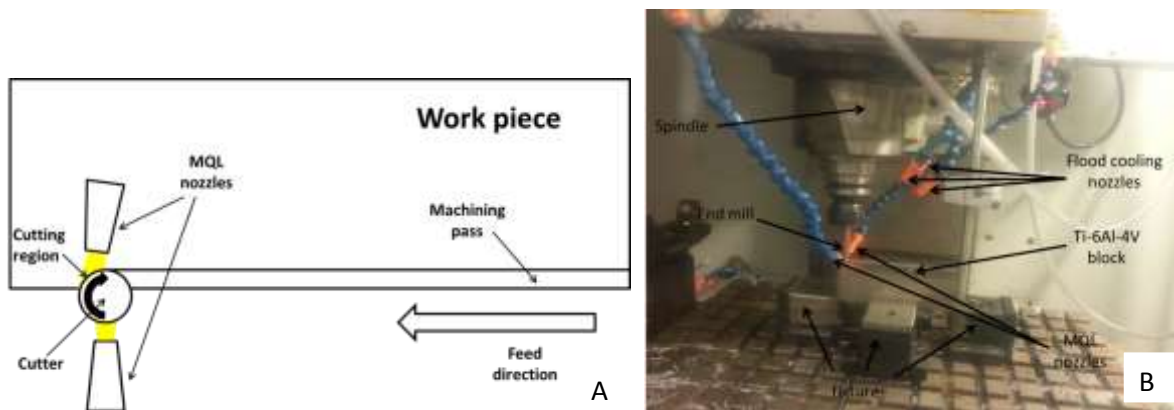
Application of MQL during milling of Ti-6Al-4V. A) Schematic of MQL nozzle positions (top view), B) dual- nozzle MQL during machining (front view)
